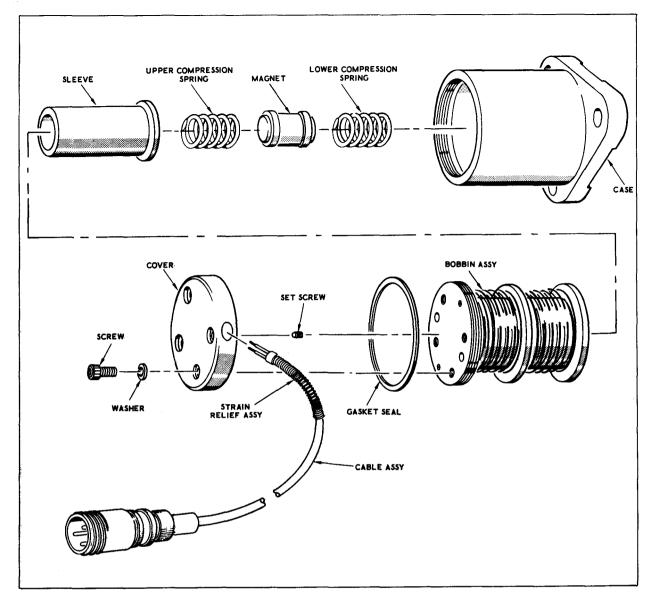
Vibration Transducer Type 4-128-0101, Exploded View
